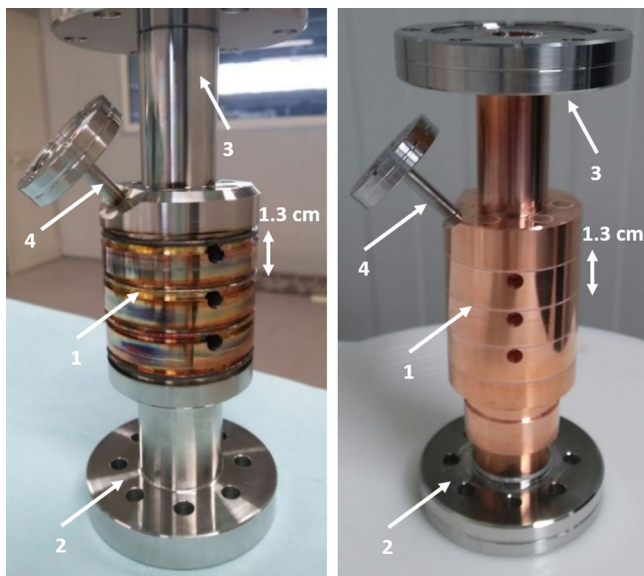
Left, single-cell cavity after TIG welding. Right, single-cell cavity after EBW. (1) Welding joints, (2) input rf flange, (3) downstream Conflat vacuum flange, and (4) Conflat flange for pumping the secondary vacuum chamber.
